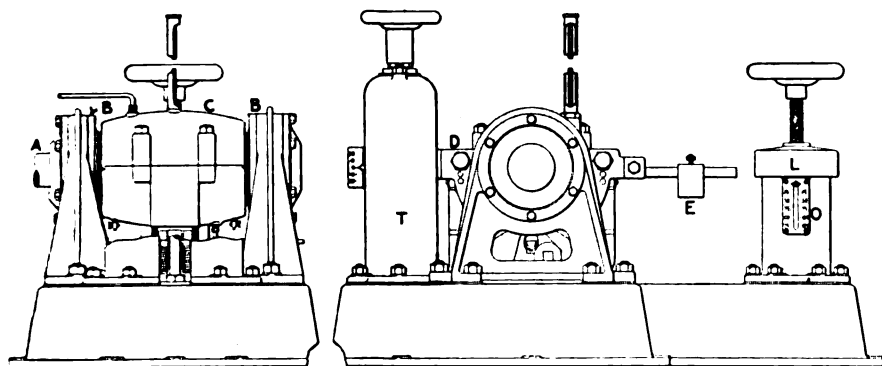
ELEVATIONS OF LUBRICATING AND TESTING MACHINE
